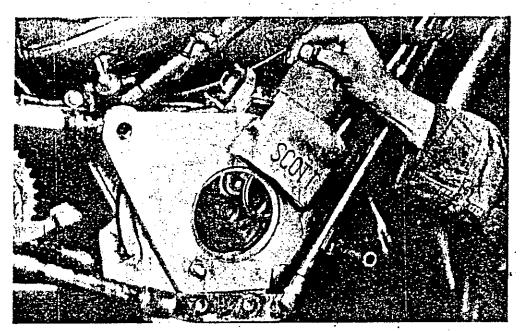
Removing Piston and Rod complete from Crankcase.
